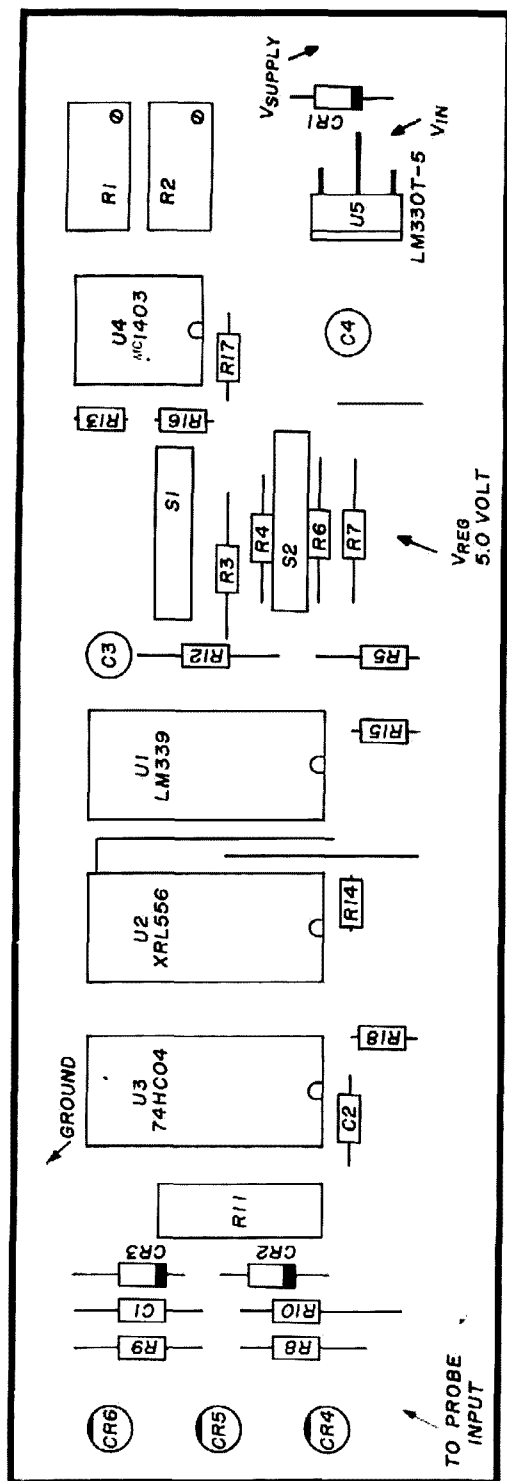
C. Component placement diagram showing pattern of 3A, 2x actual size.
